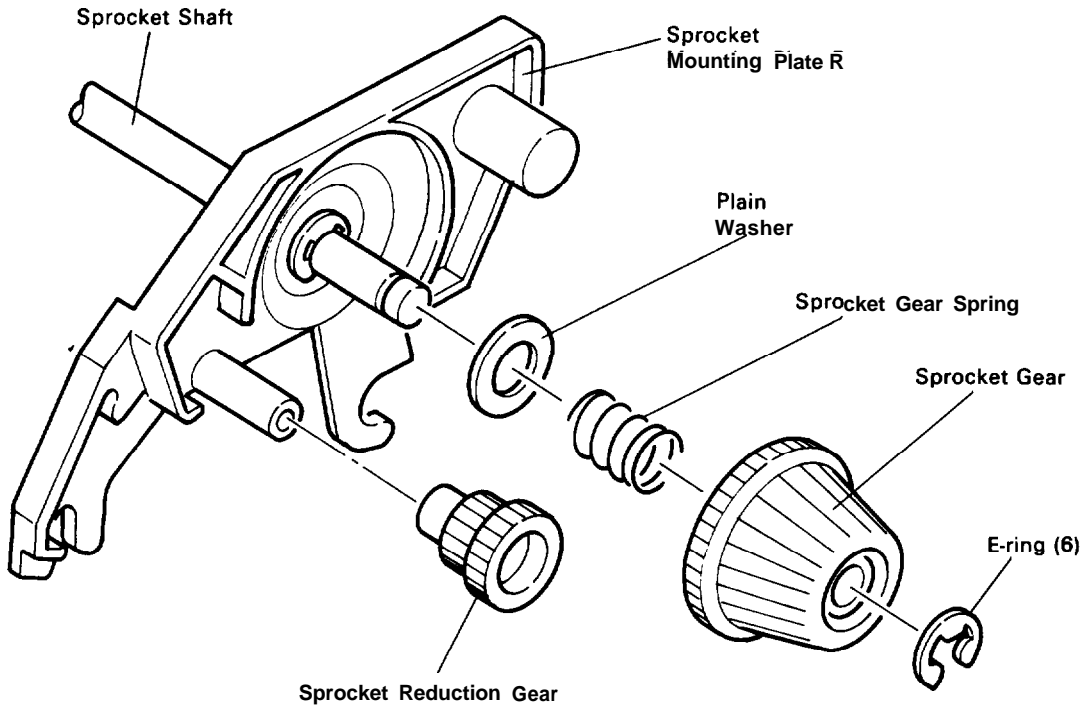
Removal of Sprocket Reduction Gear and Related Parts
